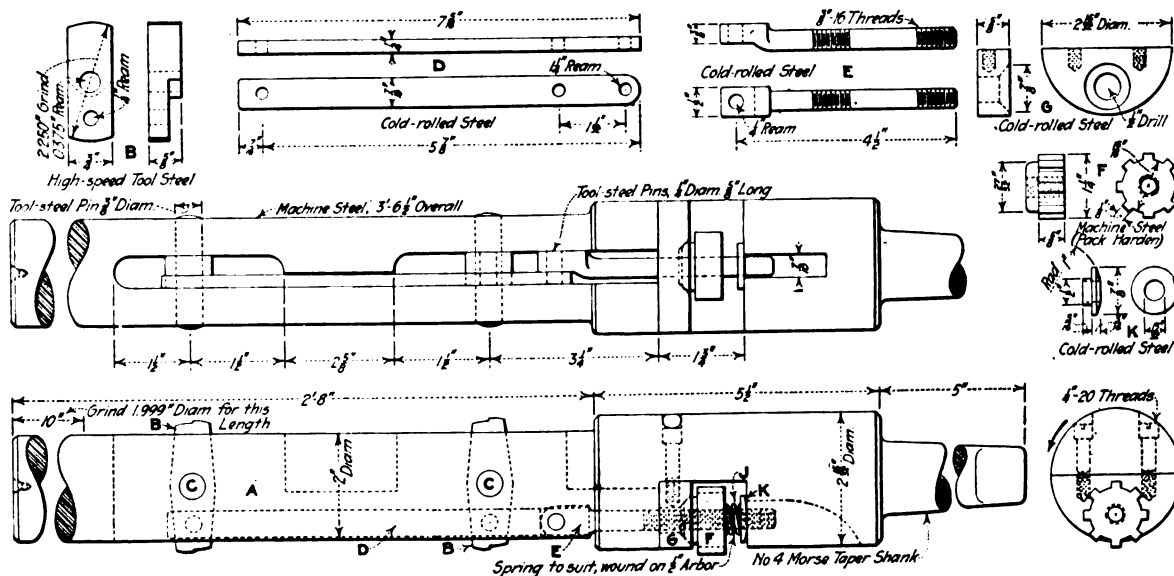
DETAILS OF SPHERICAL SEAT BORING BAR
